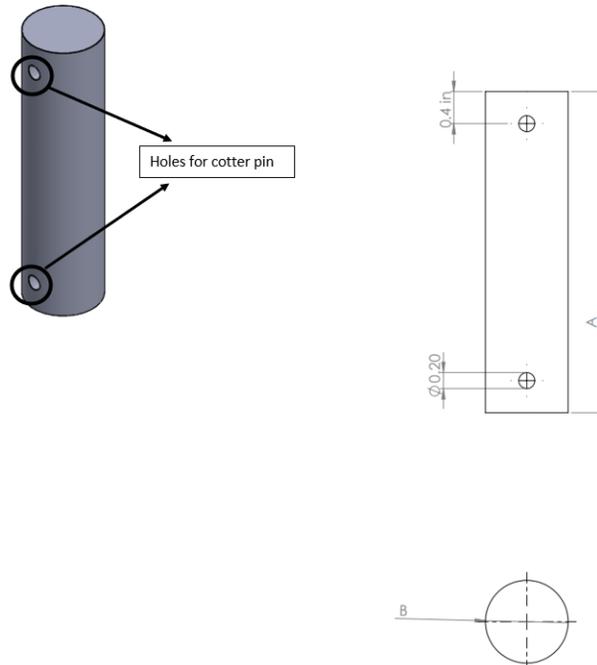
Pin Dimensions for Configuration 1 to 5 and 7
